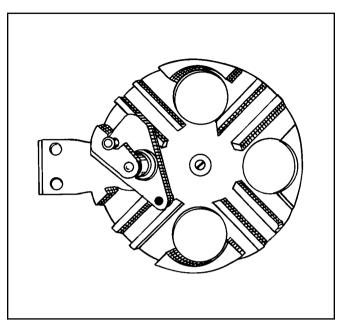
A four-slot internal geneva wheel incorporating a locking mechanism. The basic sketch is shown in Fig. 3.
